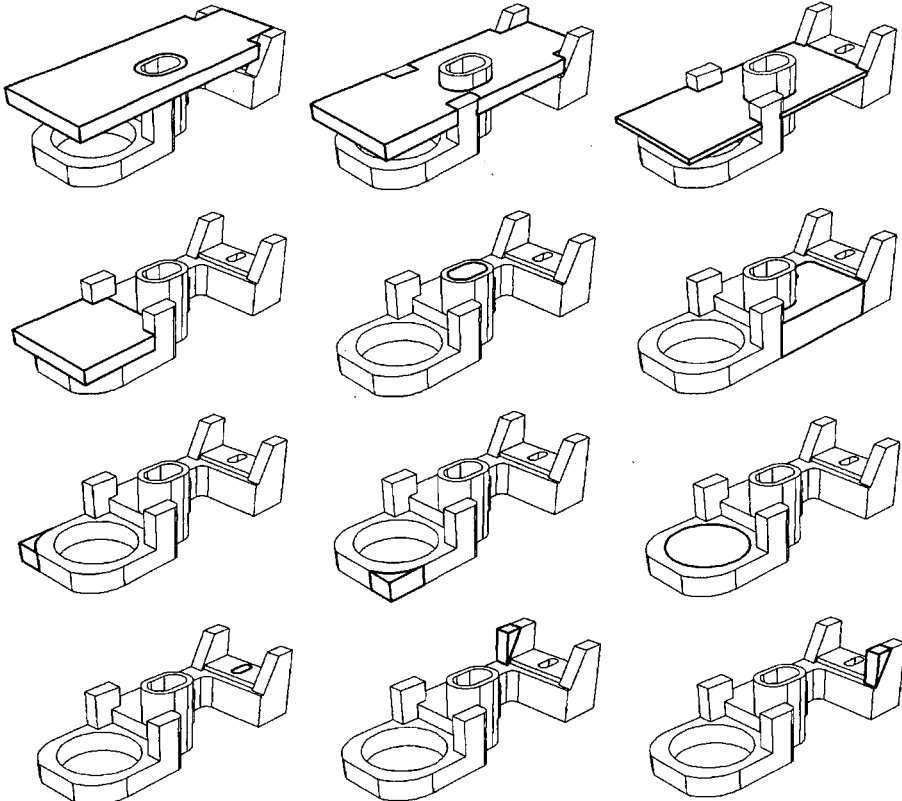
Extracted features to machine the example part in Fig. 7(a).
